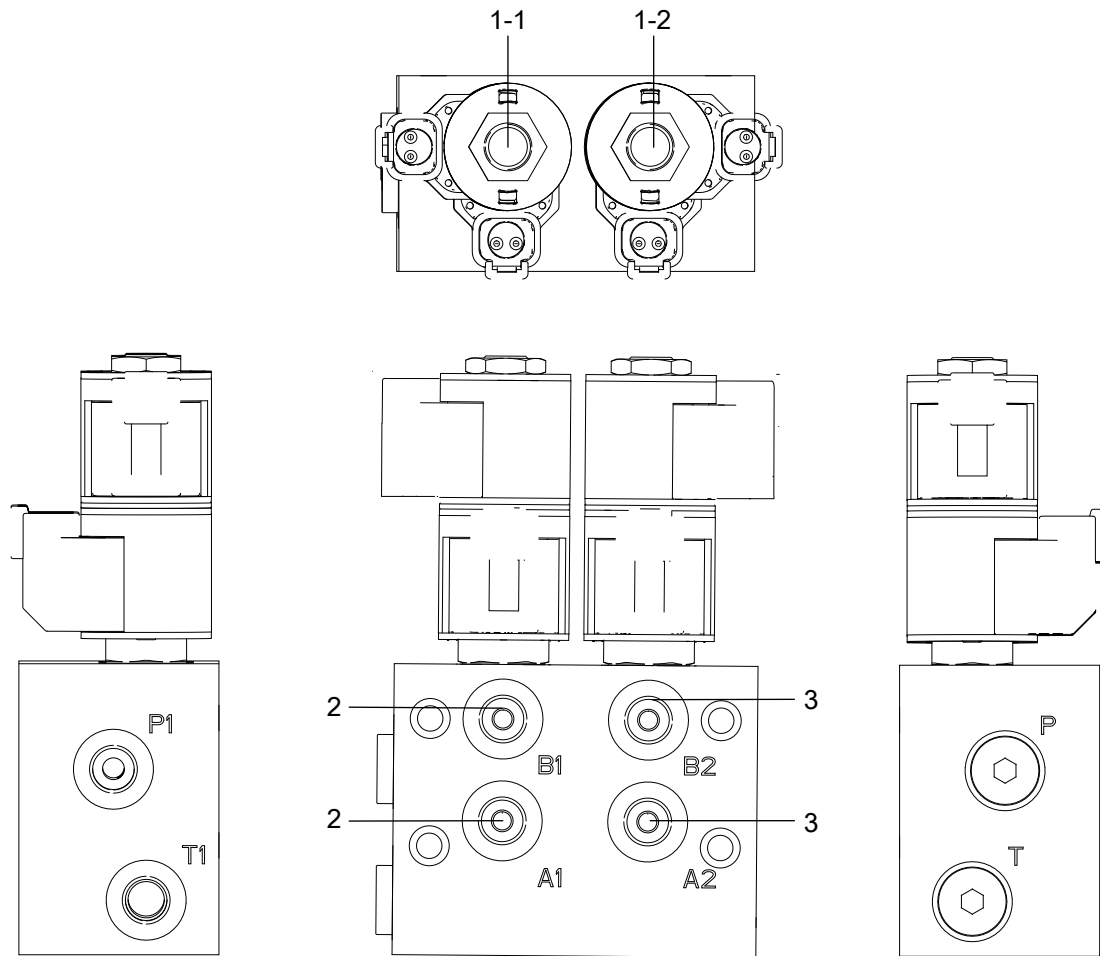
Platform Duplex Valve Manifold (PN.202040000329)
